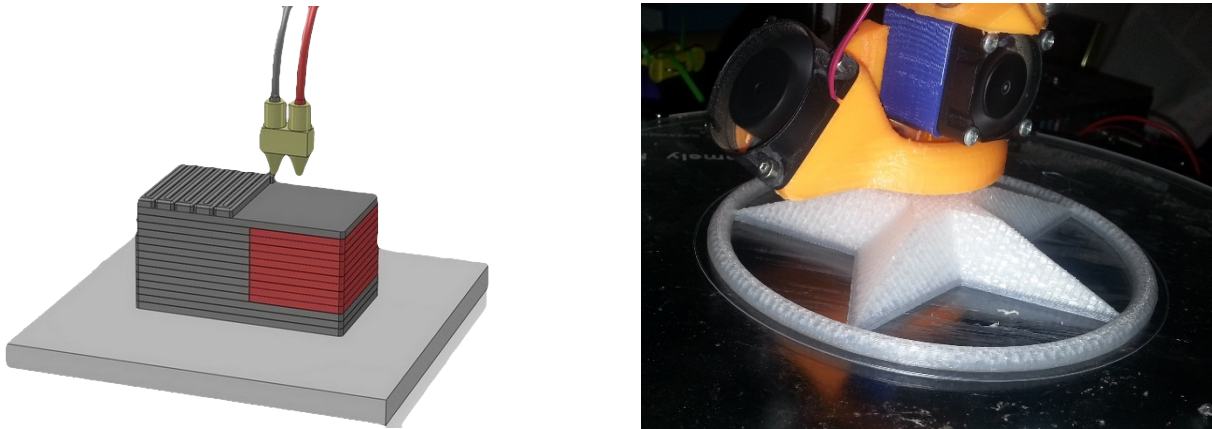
Extrusion-based additive manufacturing: (a) Material Extrusion Process [20] (b) Example of a Printed Part
